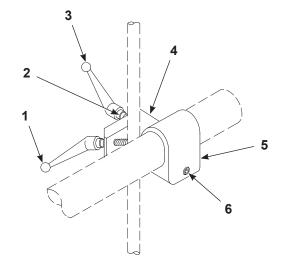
Gun Bar Mounts for Tube-Mount Guns
